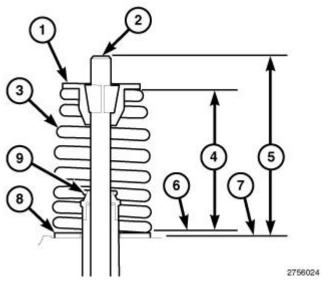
Checking Valve Spring Installed Height Courtesy of CHRYSLER GROUP, LLC
